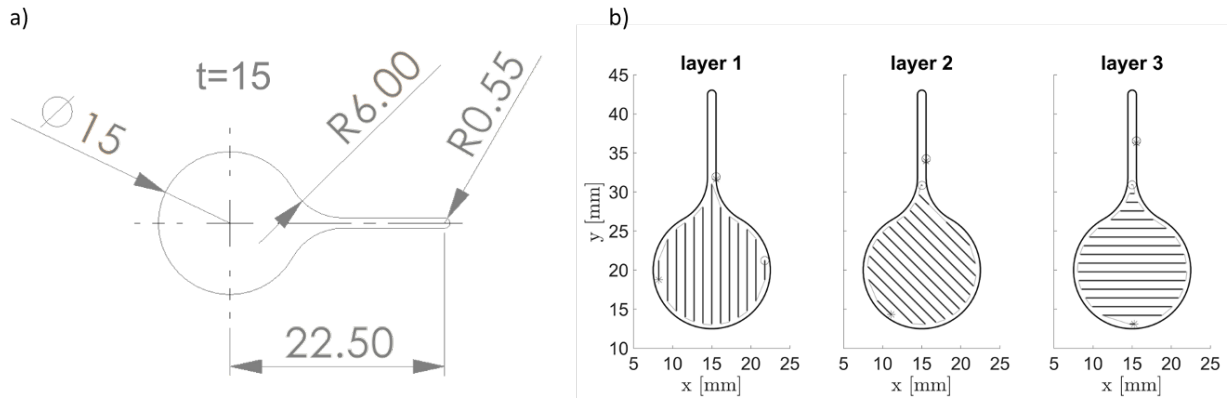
(a) Geometry and (b) tool path of the single wing demonstrator.
